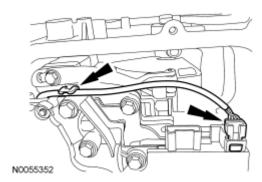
Locating OSS Sensor Wiring Harness & Electrical Connector Courtesy of FORD MOTOR CO.
